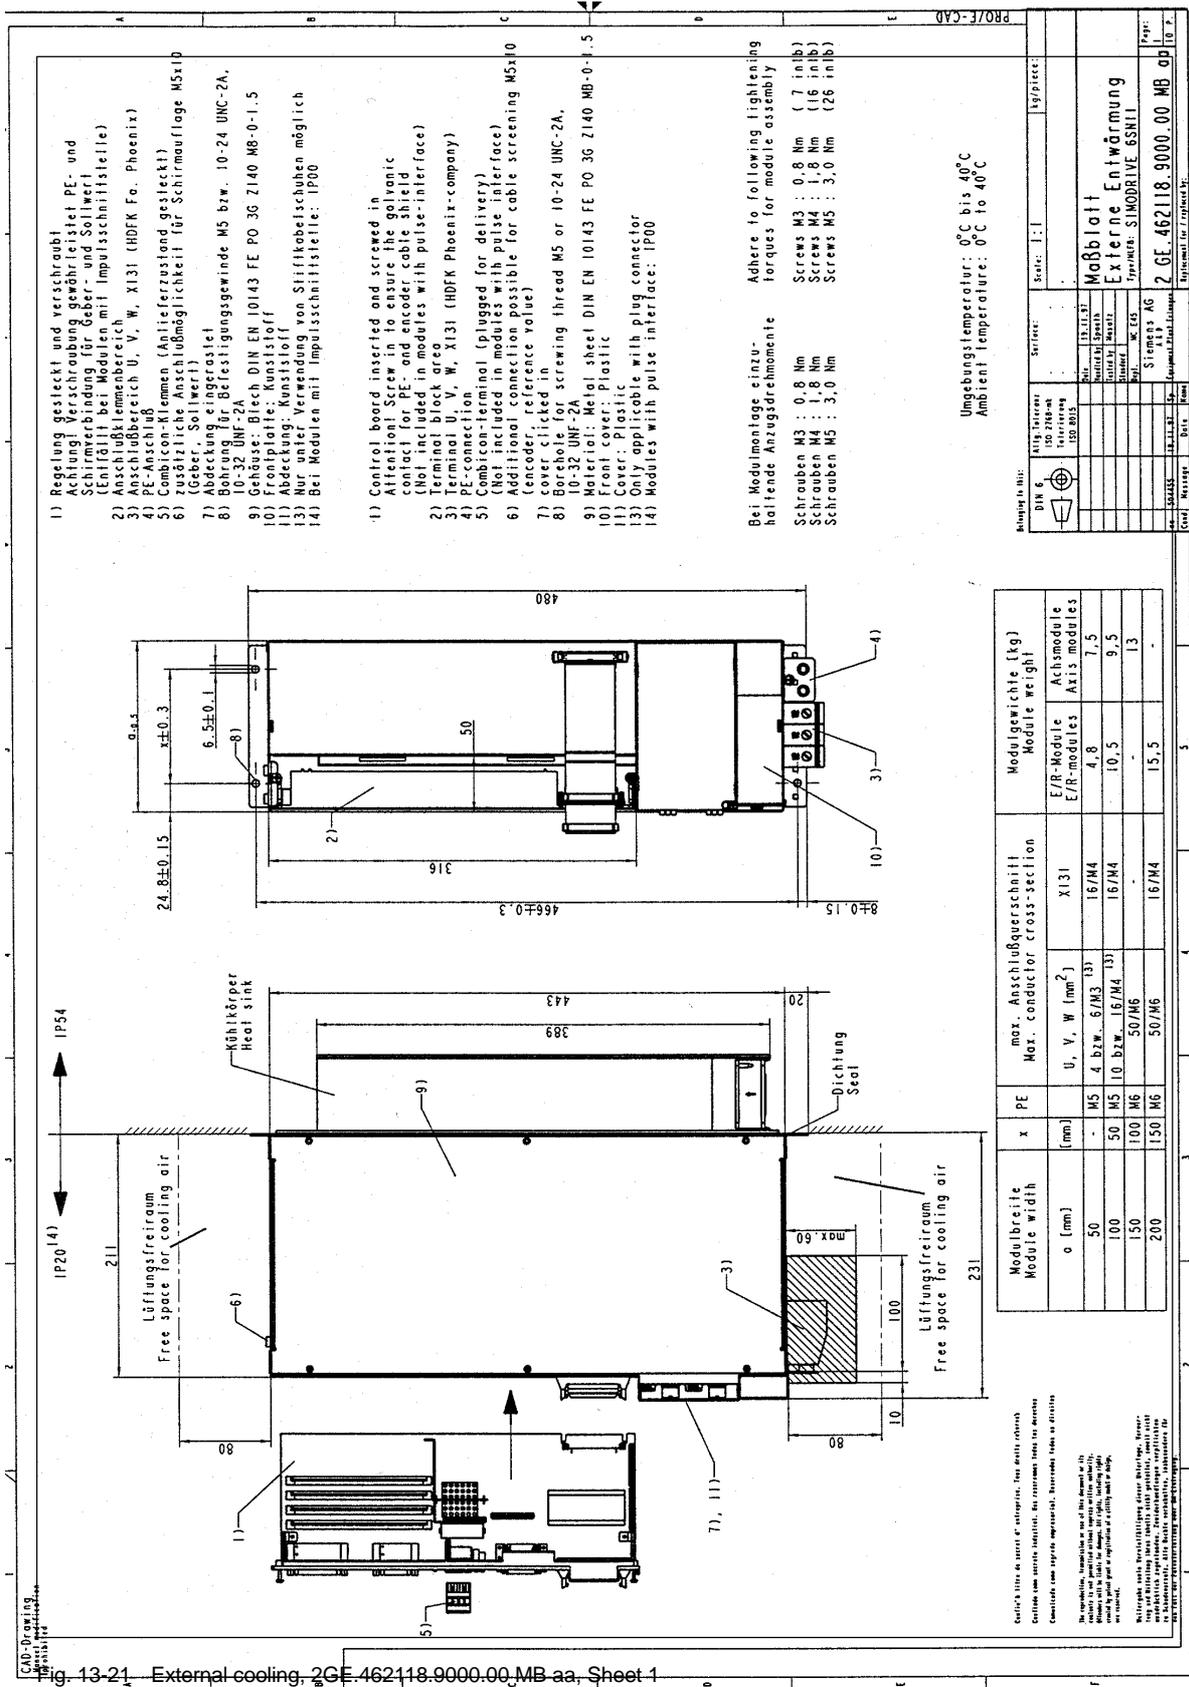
External cooling, 2GE.462118.9000.00.MB aa, Sheet 1
